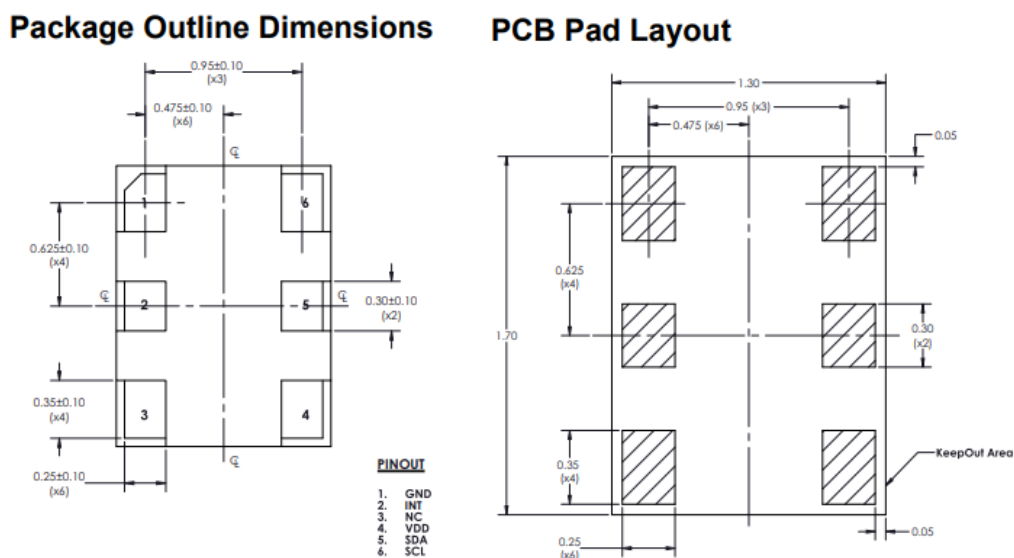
APDS-9253-001 data sheet mechanical drawing on the left and PCB footprint on the right
